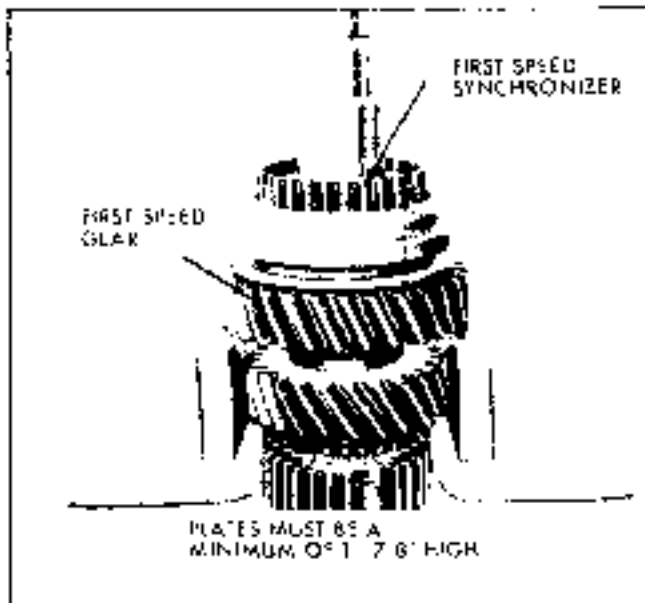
B-17 Removing First Speed Synchronizer and Gear
